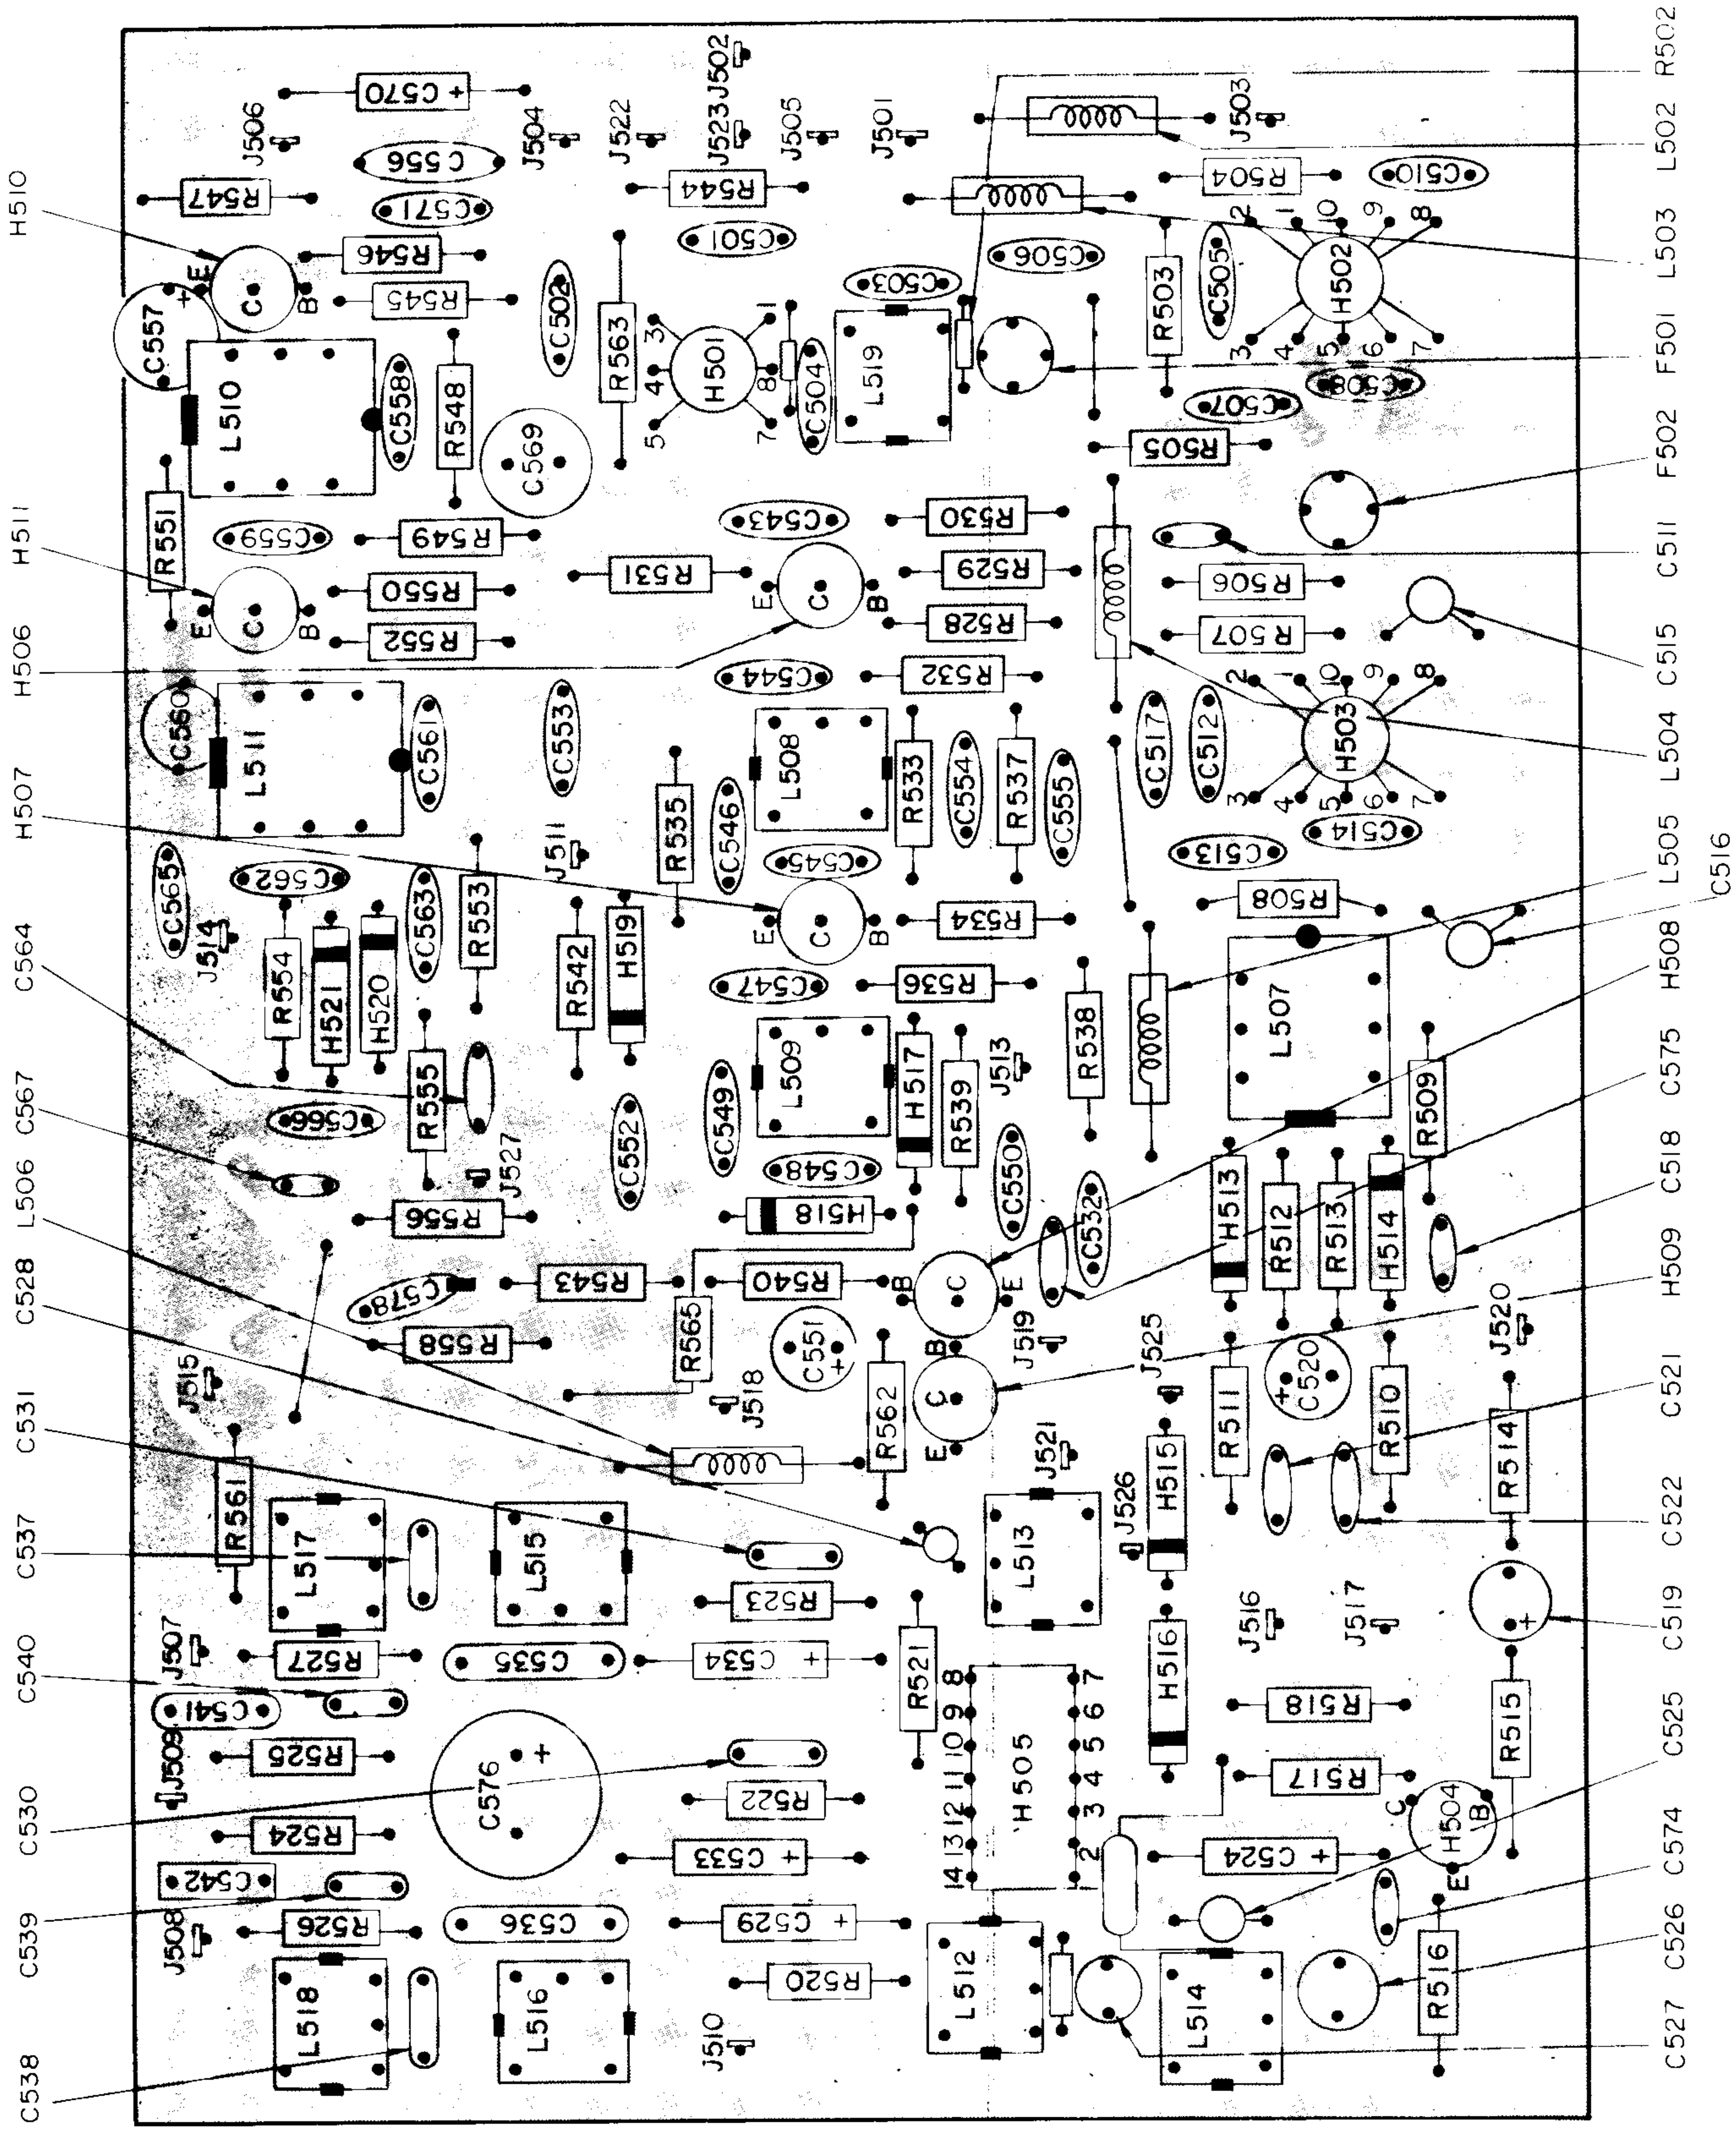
AM-FM IF and FM-MPX Demodulator Assembly P500 Component Locations
